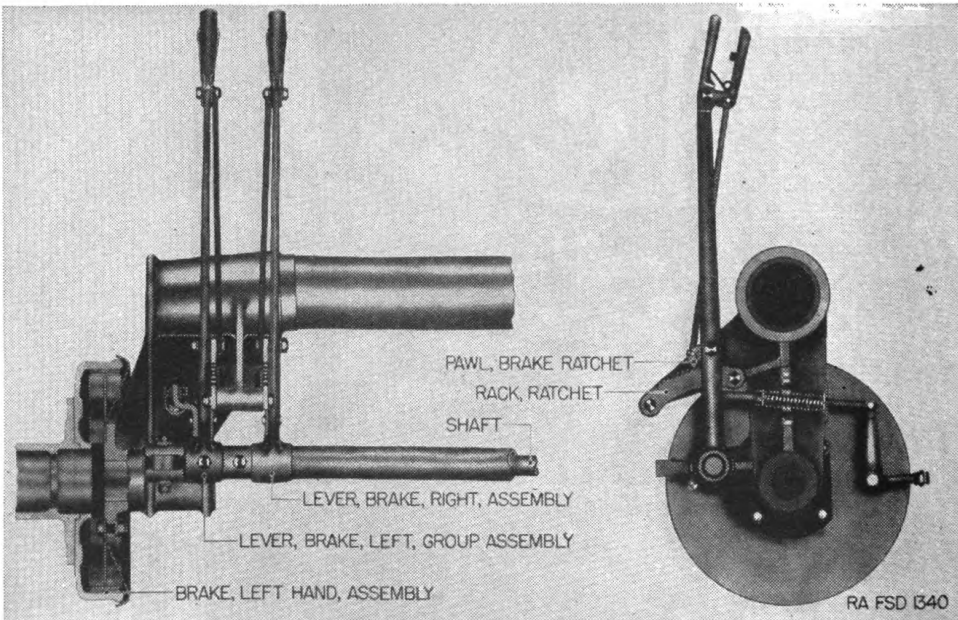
Mechanism, brake, for carriage, M1917A1.
